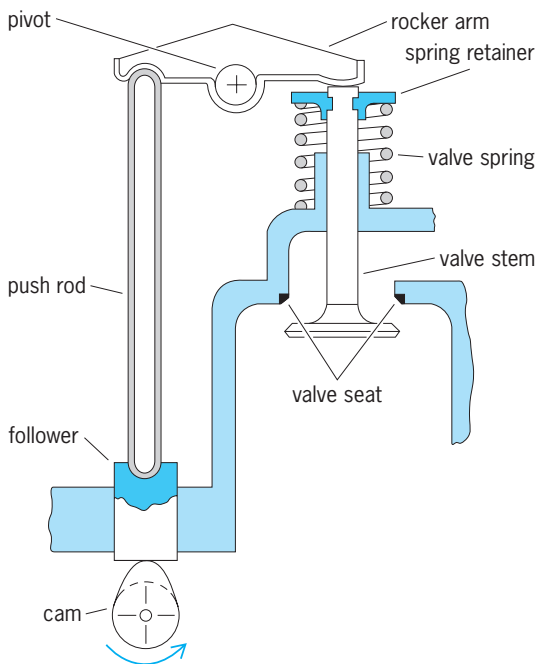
Valve train of an internal combustion engine. (Courtesy of Albert Pisano)
